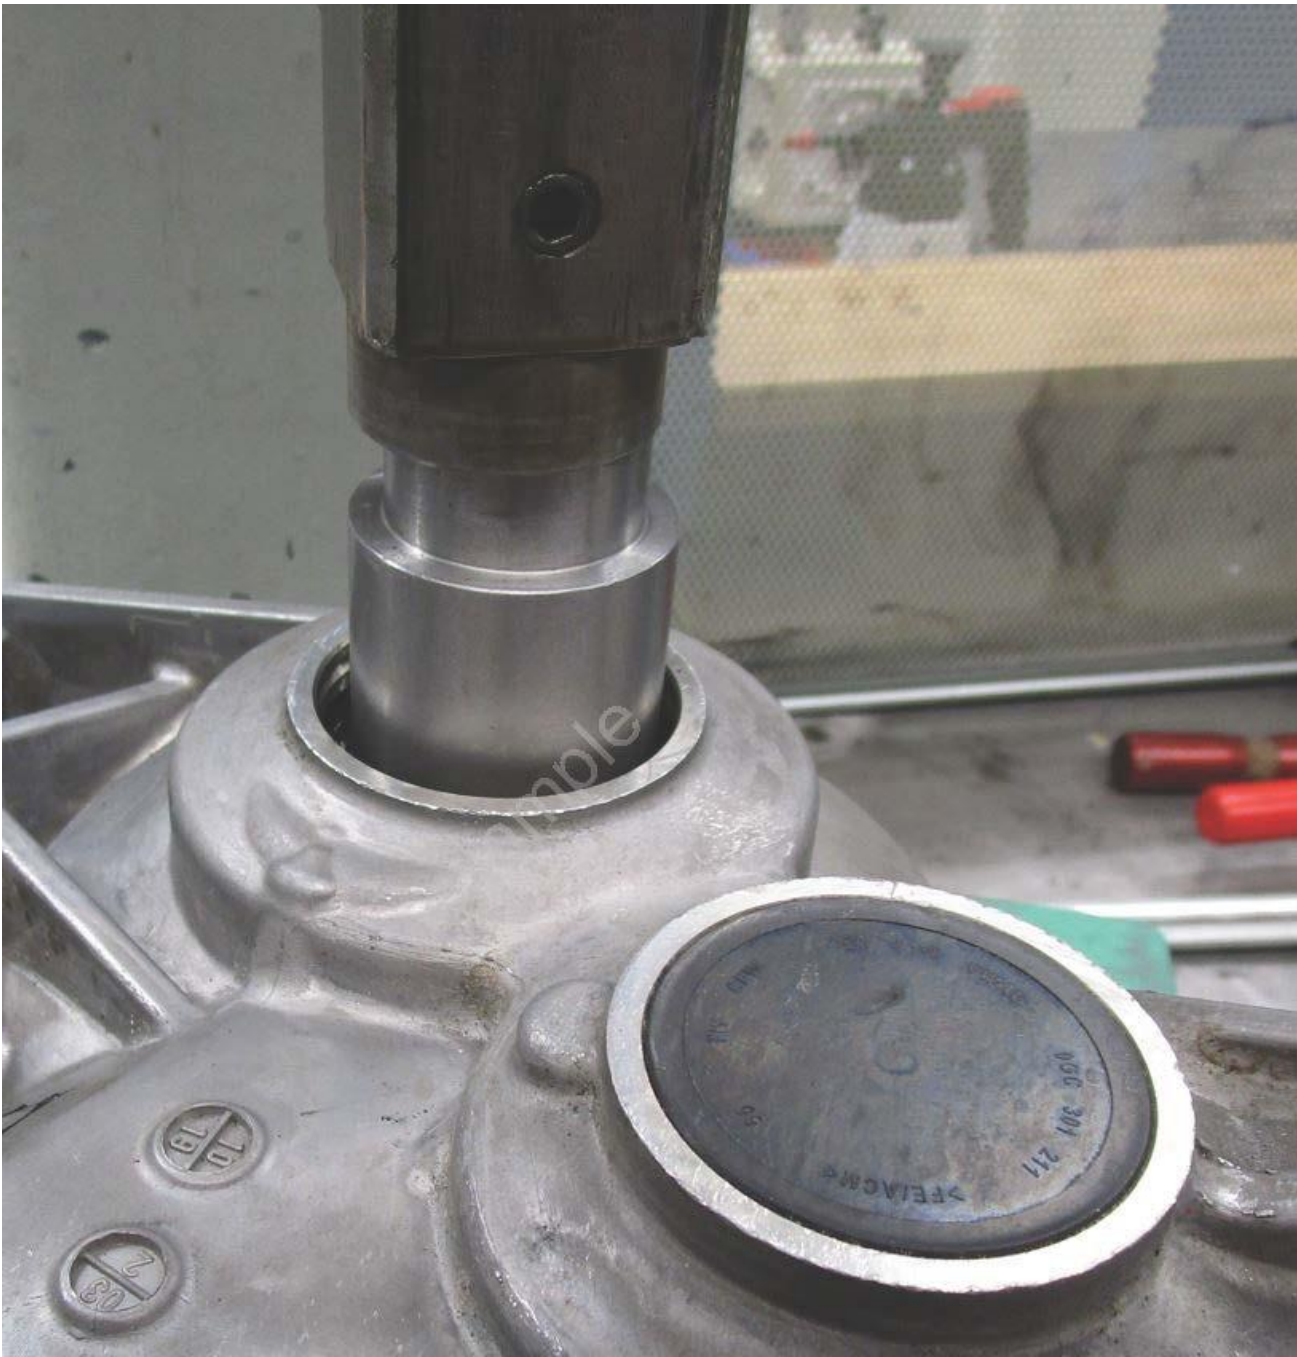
Pressing out the bearing for the intermediate shaft (example).
